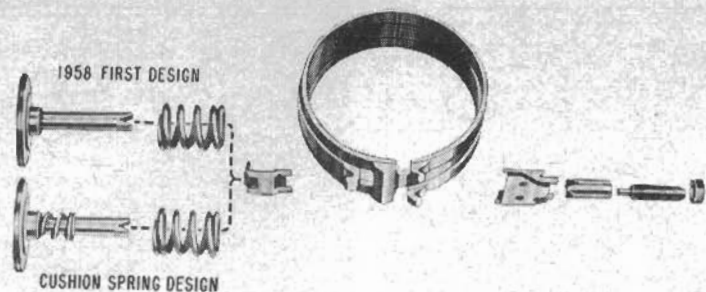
Low brake band and related parts. 1953-57 and late production 1958-59 uses the cushion spring design
